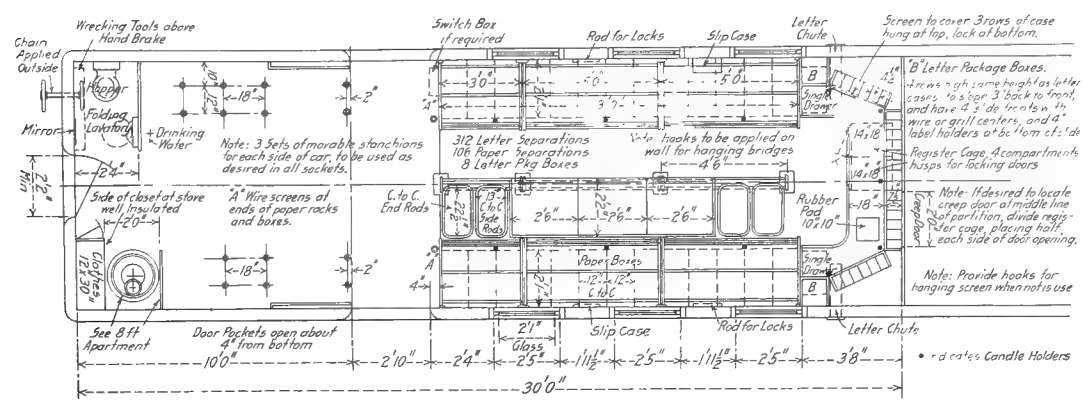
Floor Plans Showing U. S. Government Requirements for 30 ft. Mail Apartment.
